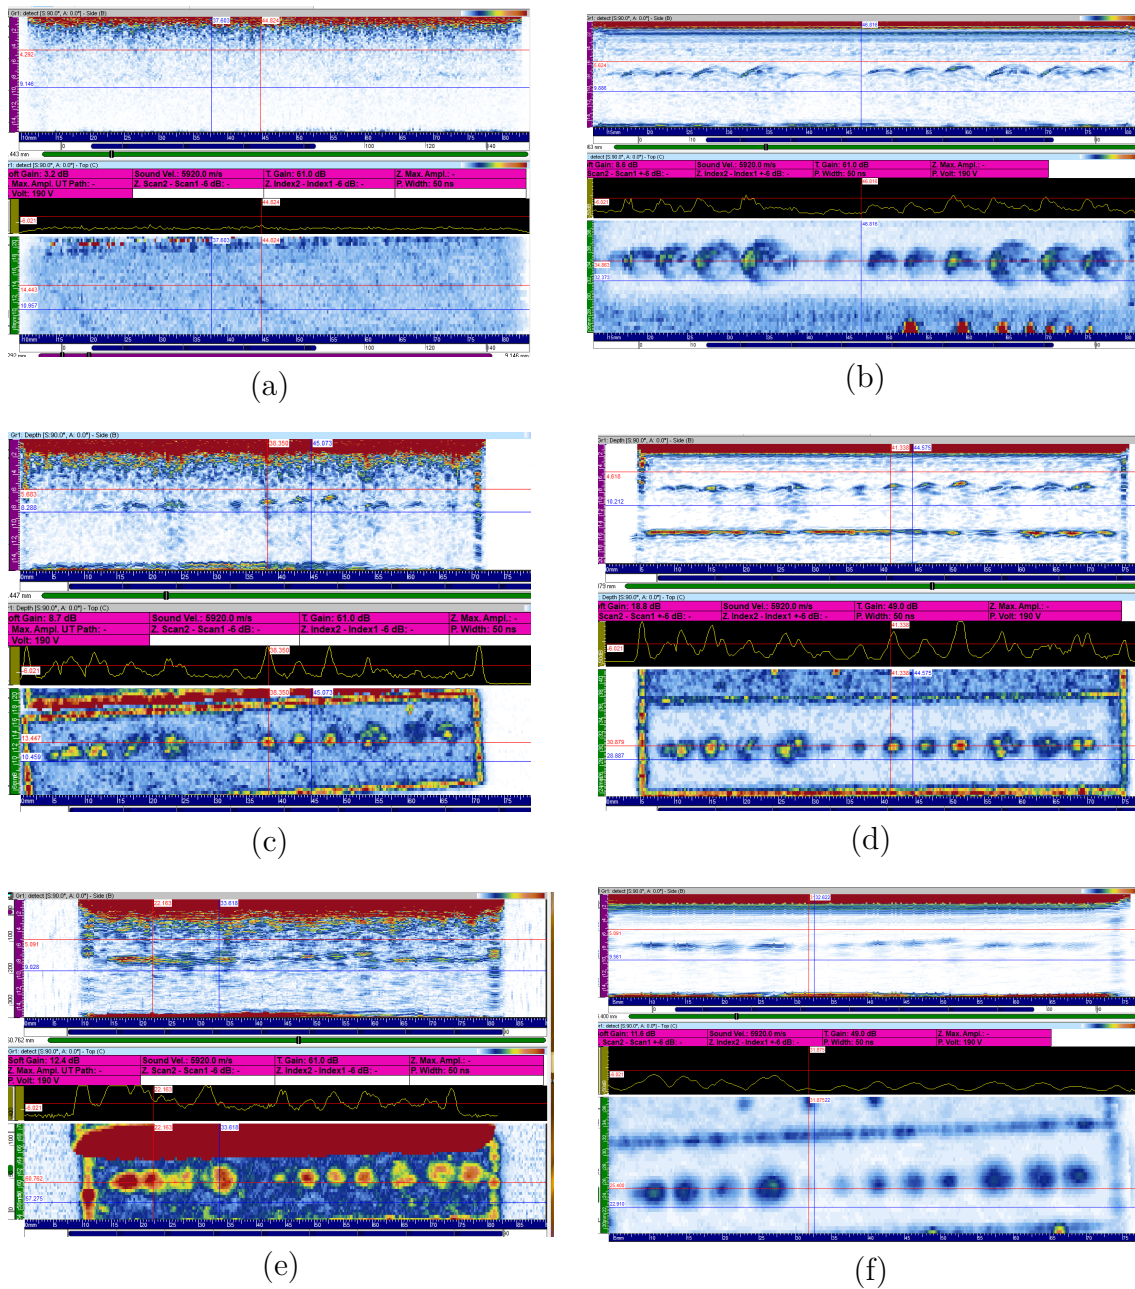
Ultrasonic response from Block 2B, with defect detection using various probes: (a) 1.5" unmachined surface, (b) 1.5" machined surface, (c) 2.5" unmachined surface, (d) 2.5" machined surface, (e) 3.25" unmachined surface, and (f) 3.25" machined surface. The B-scan is shown in the top window and the C-scan in the bottom window for all cases.
